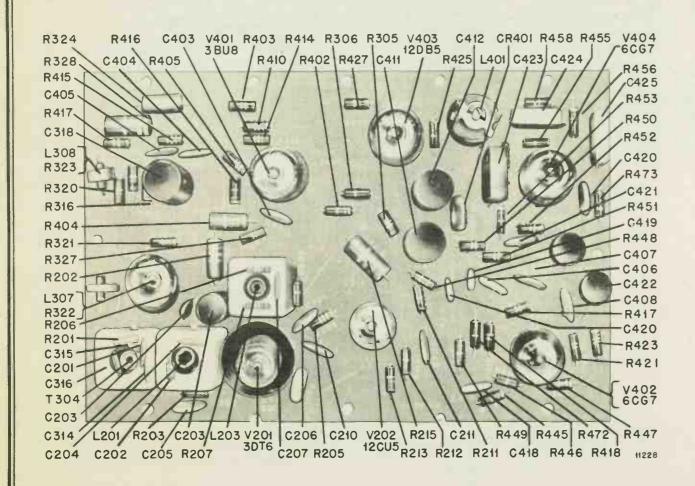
View of Component Side of Printed Wiring Board A5780-5 used in 16R1C, 16AR1C, 16S1C and 16AS1C Chassis. See Service Manual No. ST597-2 for other Printed Wiring Views.
